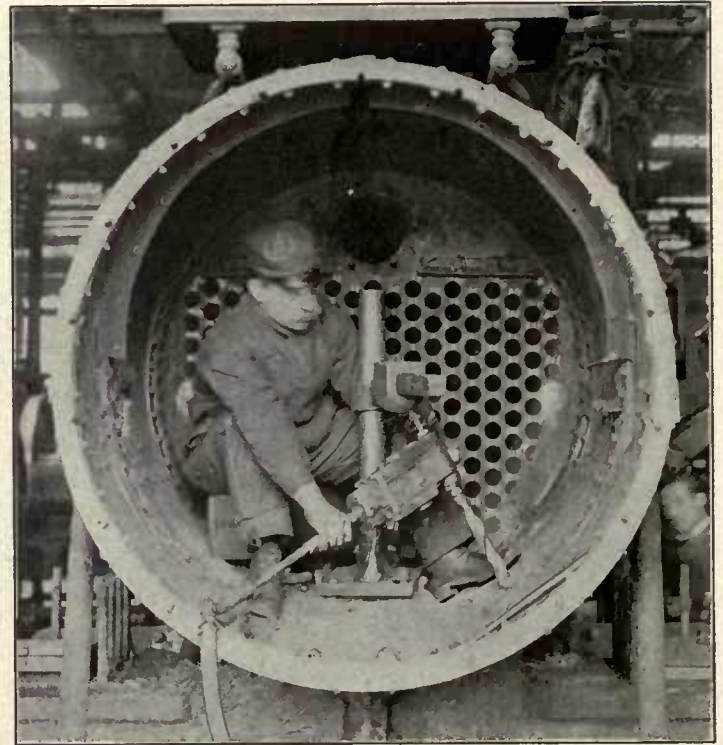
"Old Man" with Ball-Bearing Head for Drilling Saddle Bolt Holes.
